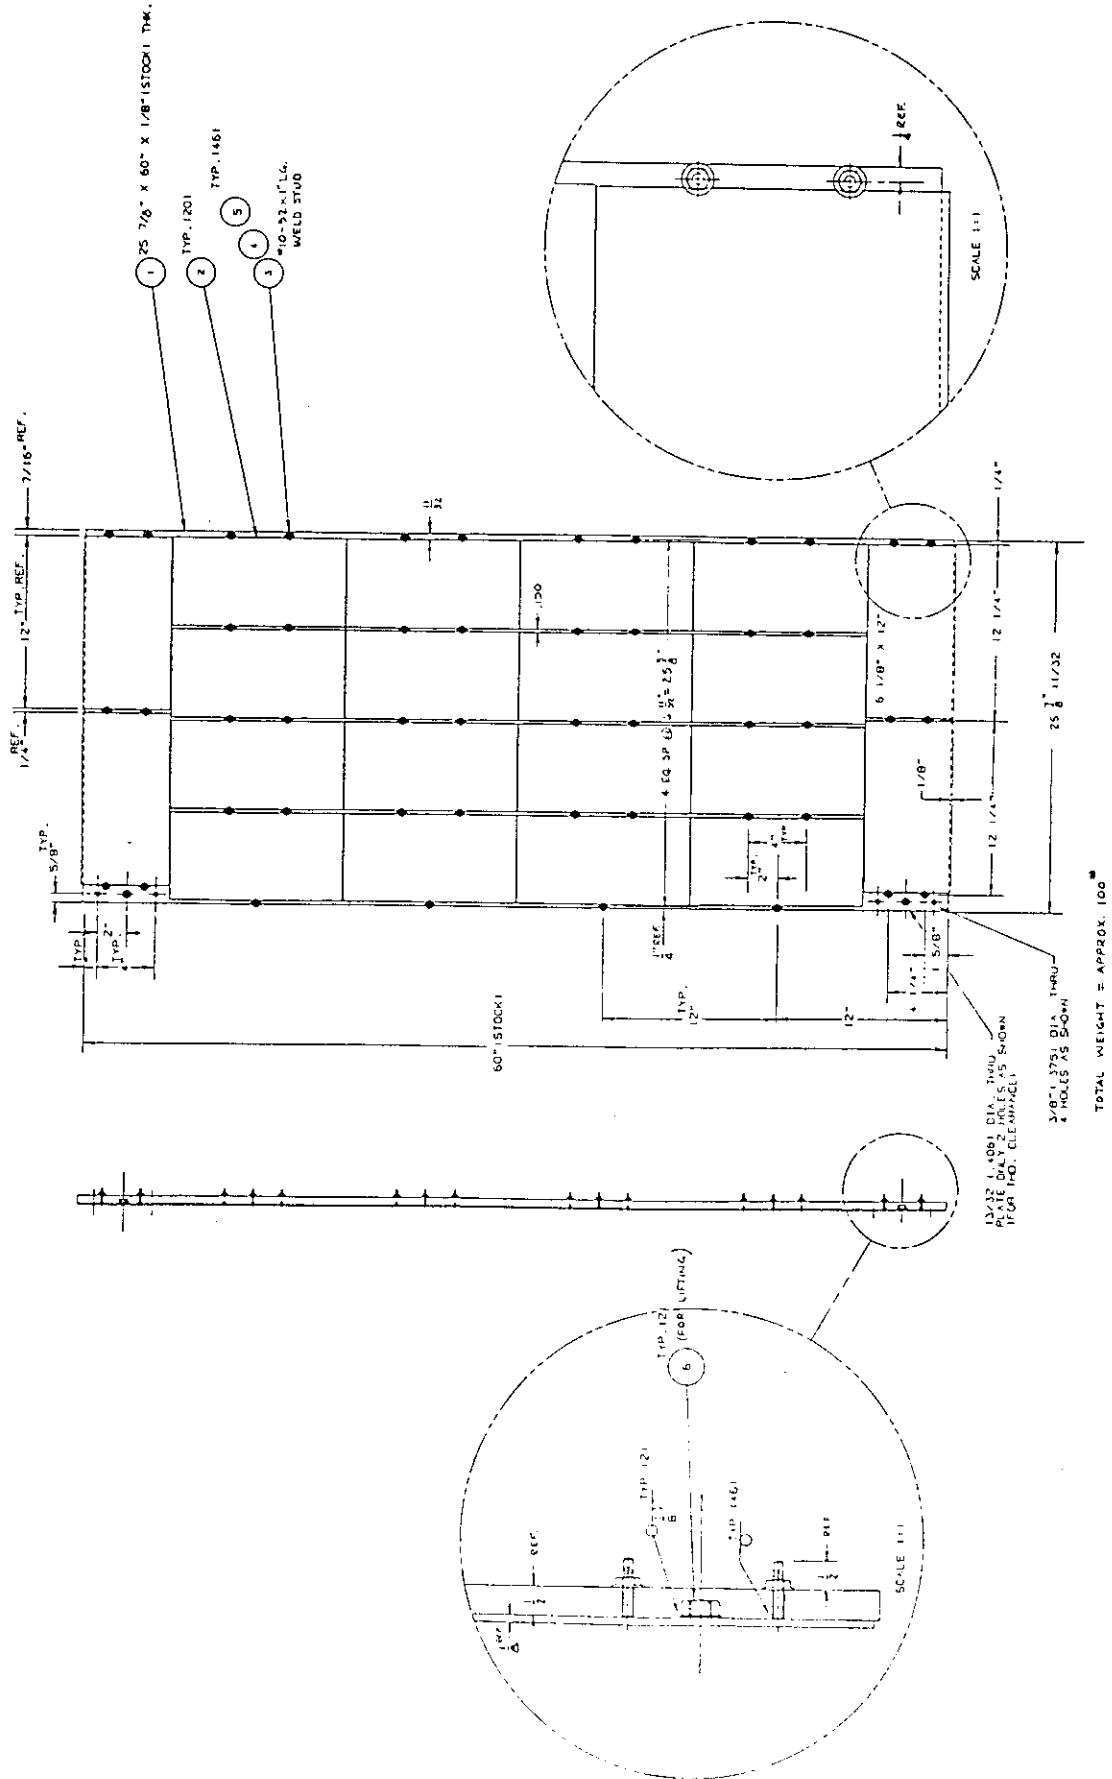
Test Section Heater Plate Subassembly (Reduction of ANL Dwg. No. R0408-0010-DD).
